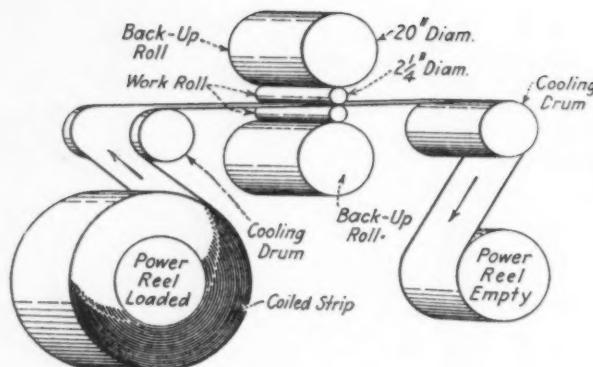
Four-high Steckel cold rolling mill with tension reels.
